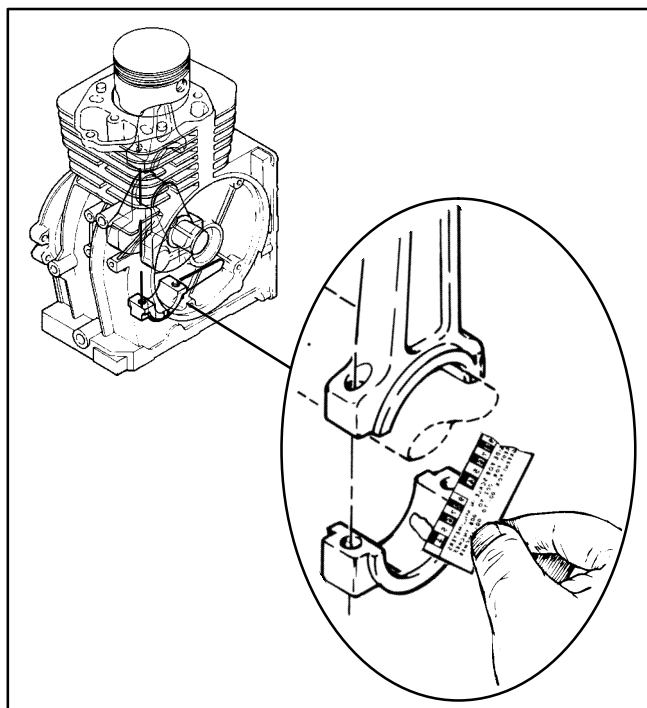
USING PLASTI-GAGE TO MEASURE CRANKPIN CLEARANCE
